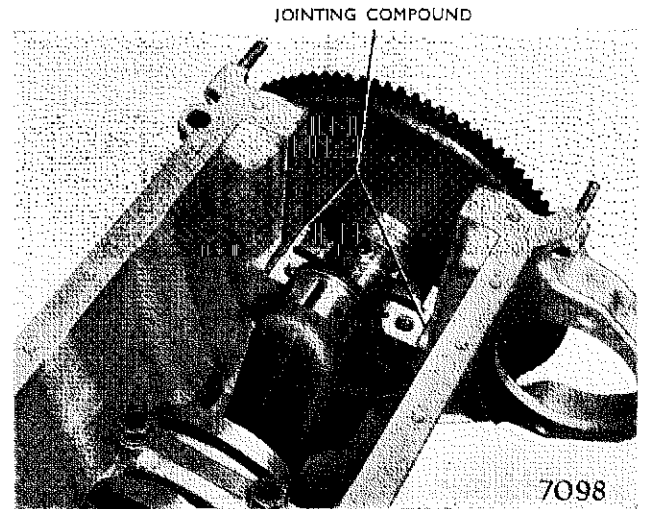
Places at which jointing compound is applied before fitting rear main bearing cap
